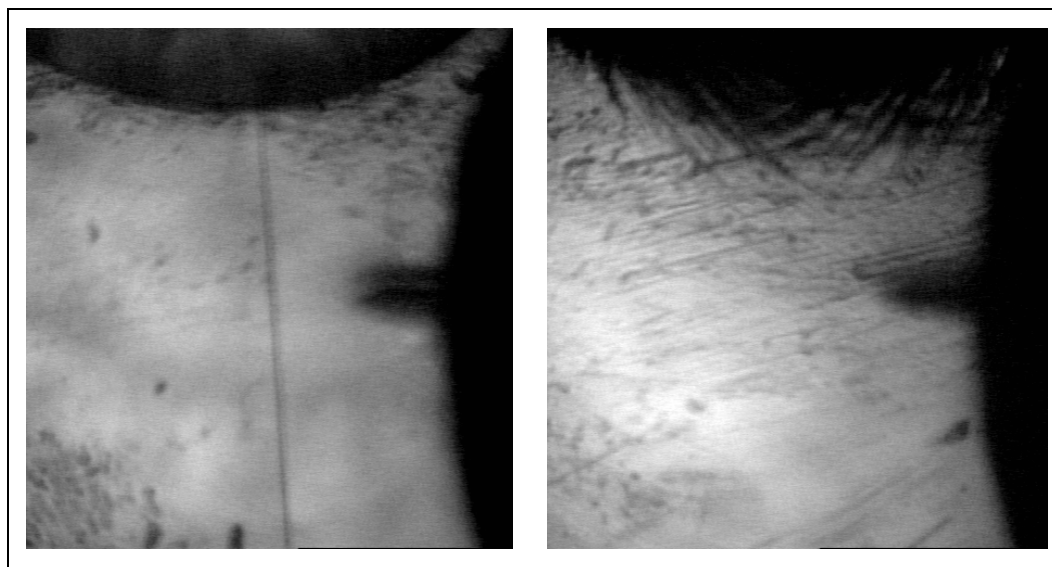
Elimination of weld line for the flat plate with circular pin using RHCM.
